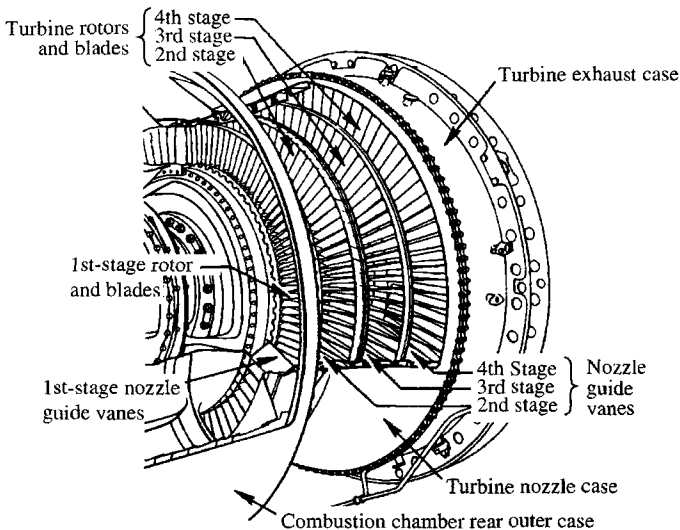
Isometric section of multistage turbine. (Courtesy of Pratt & Whitney.)
